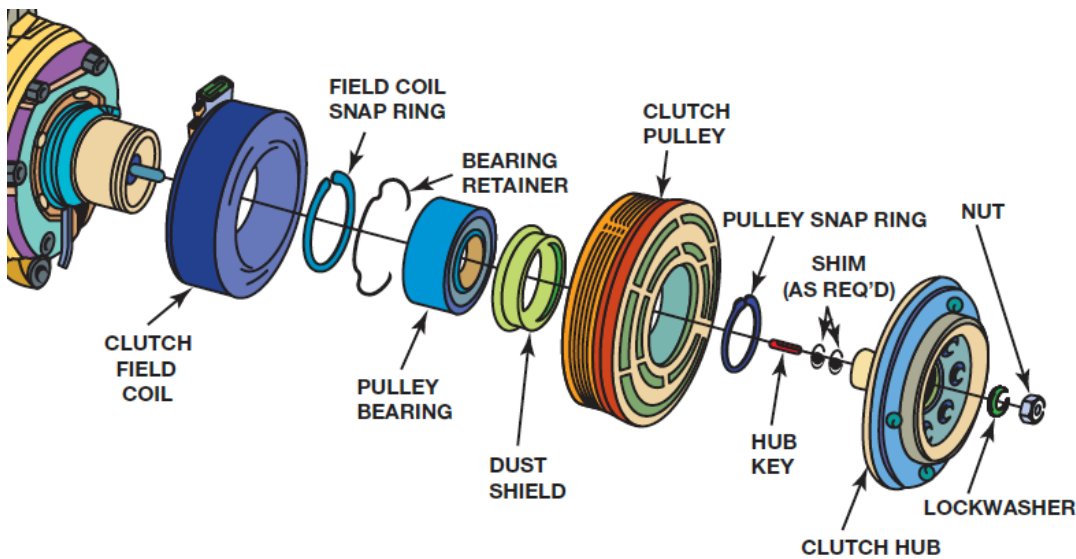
Electromagnetic clutch assembly. Shims are used to adjust the space between the clutch hub and the clutch pulley (air gap).
